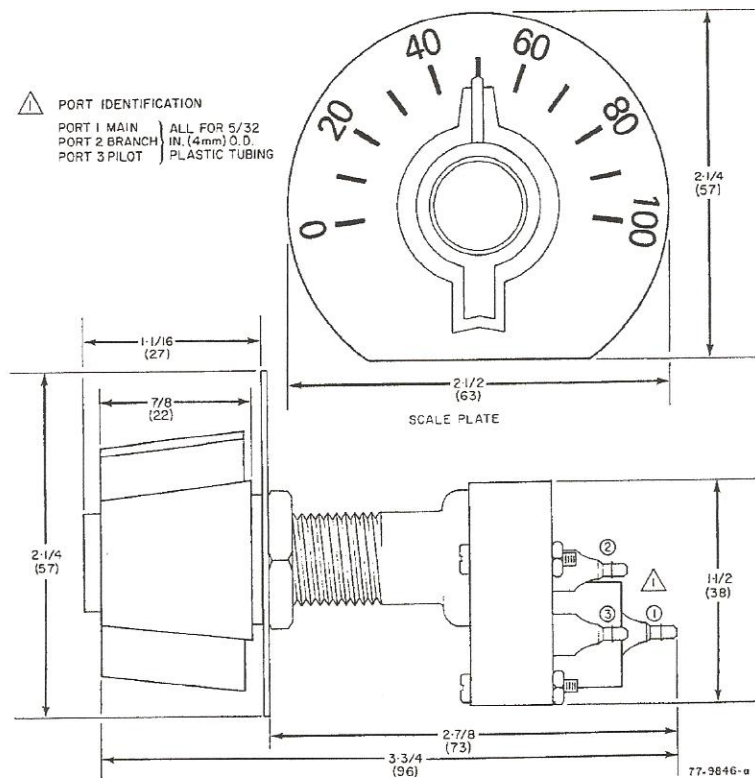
APPROXIMATE DIMENSIONS OF RP975A WITH SCALE PLATE AND KNOB IN INCHES (MILLIMETERS)
